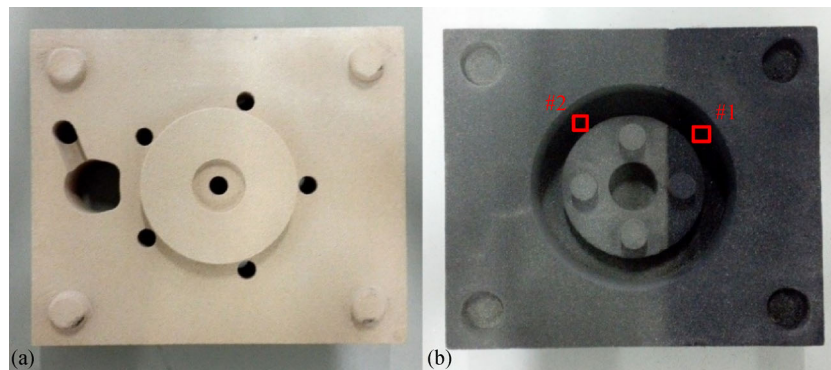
Multi-material sand molds for the cast-iron parts of a typical pulley: (a) Top and (b) bottom sand molds.
